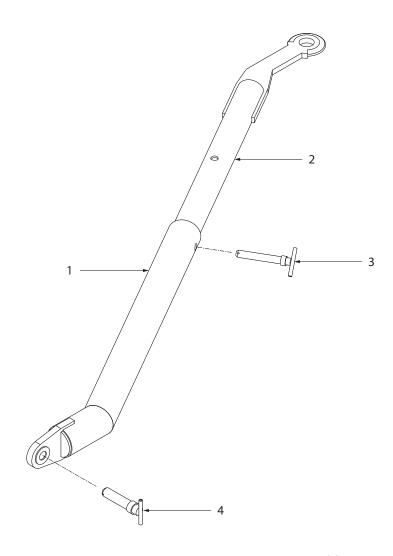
AGSE-E21526-S01 Tow Bar Assembly
